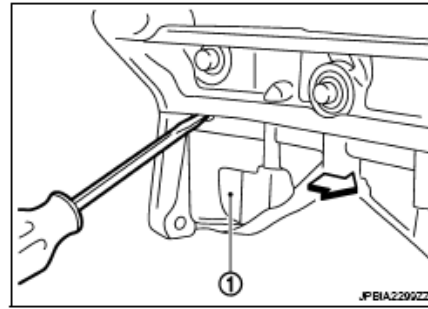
Inserting Suitable Tool Into Notch Oil Pan
